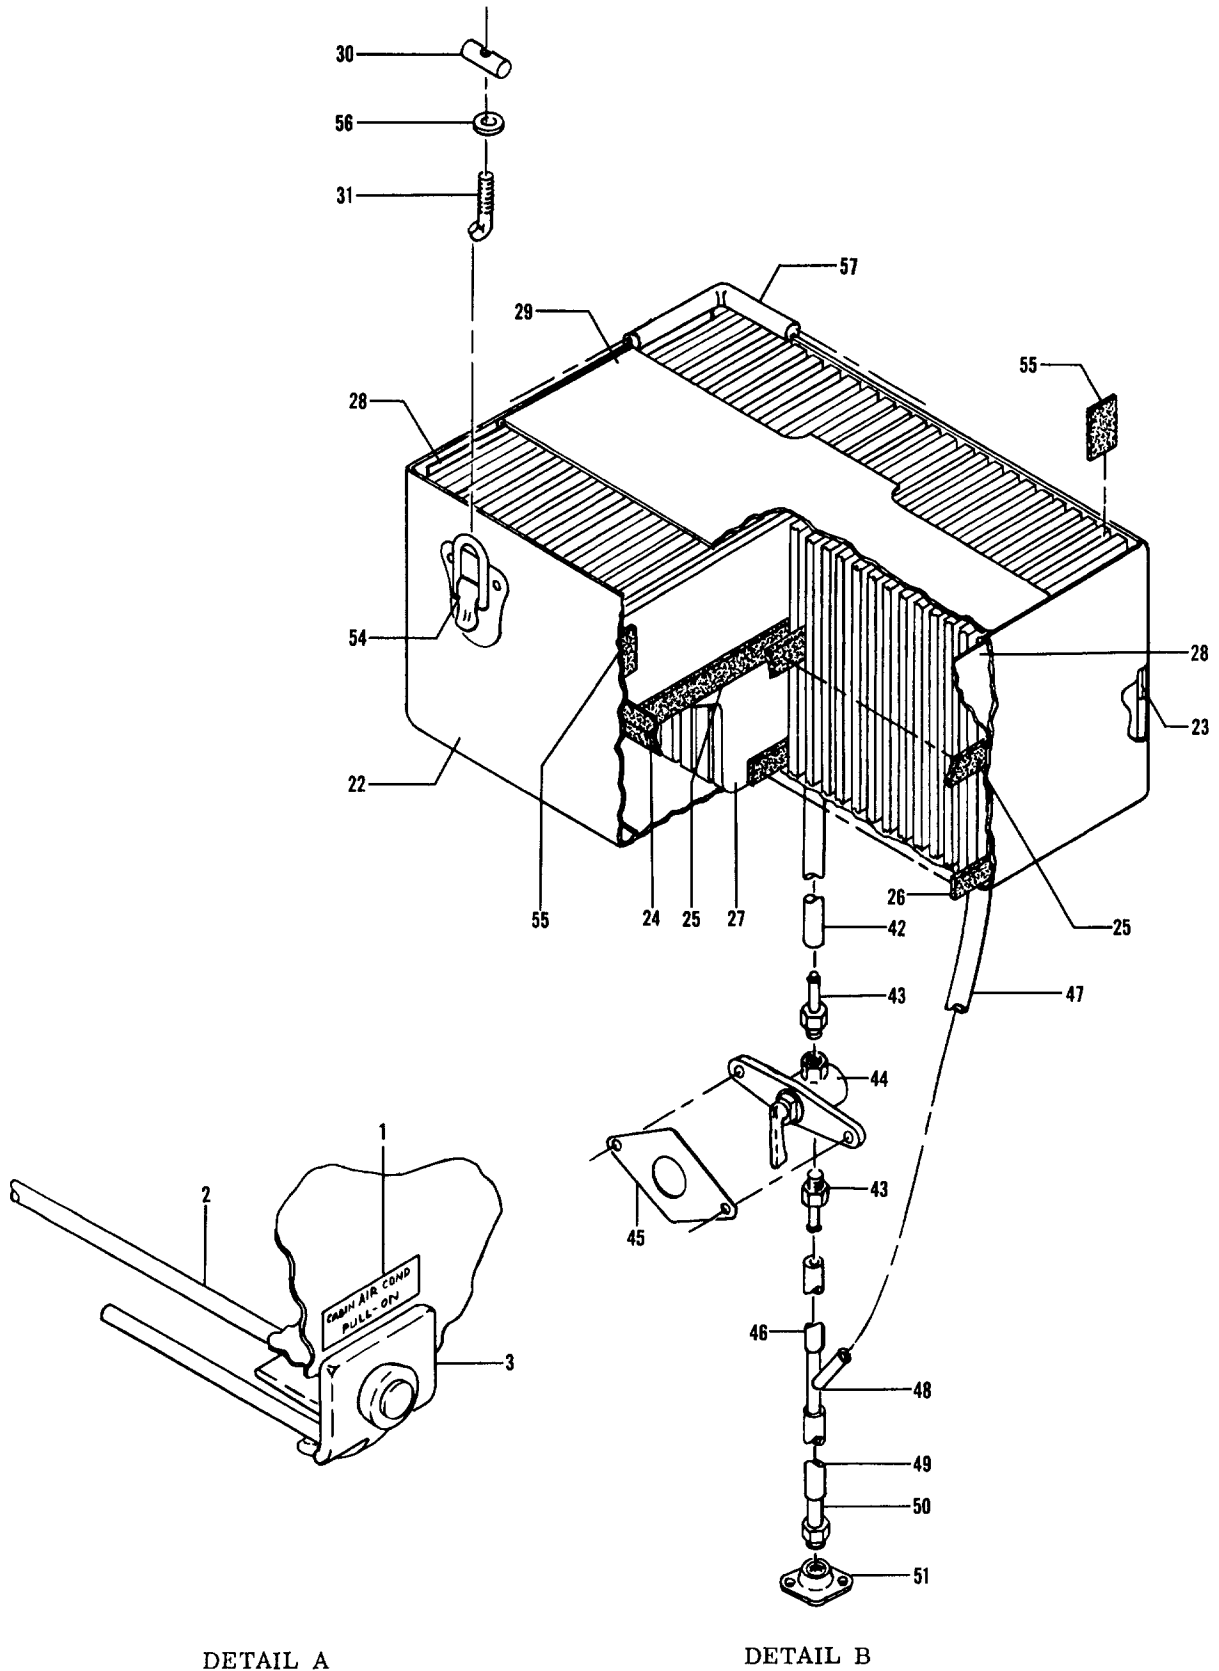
Cabin Air Conditioner (Sheet 1 of 2 sheets)
